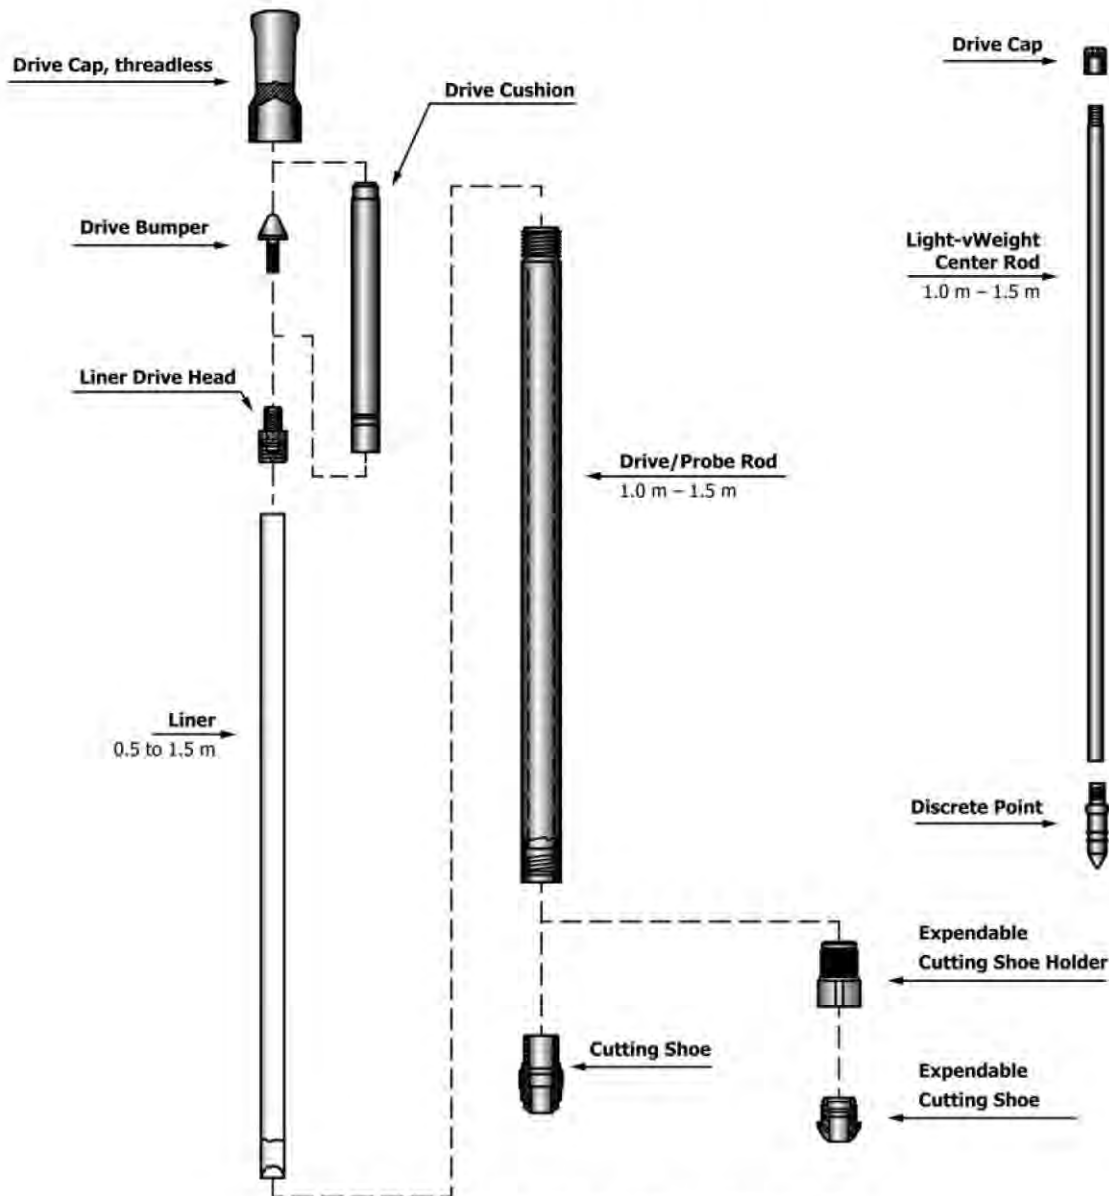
Dual Tube Sampler with Inner Liner and Inner Rods
